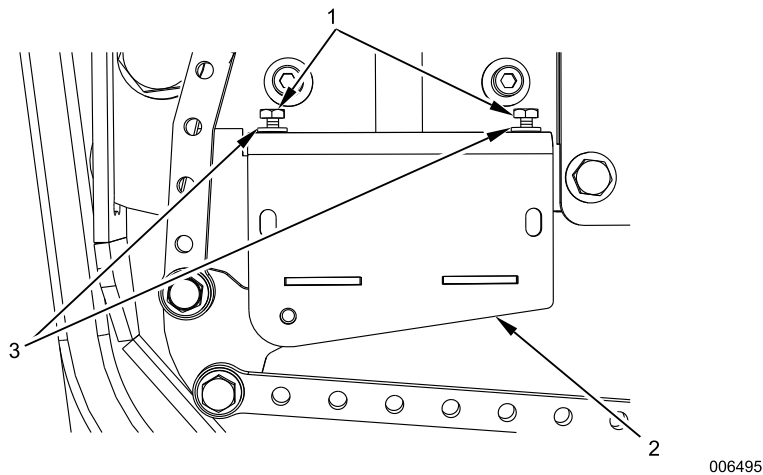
Upper Hex Bolt Removal from Inner Shaft Lockplate Bracket.
